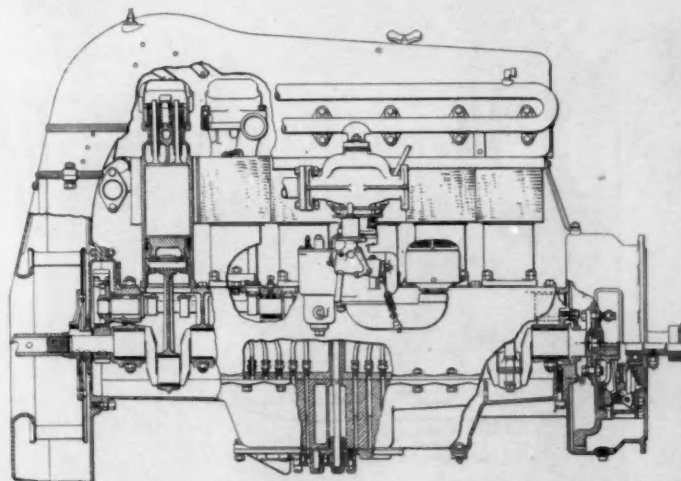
SIDE VIEW OF THE ENGINE ASSEMBLY
